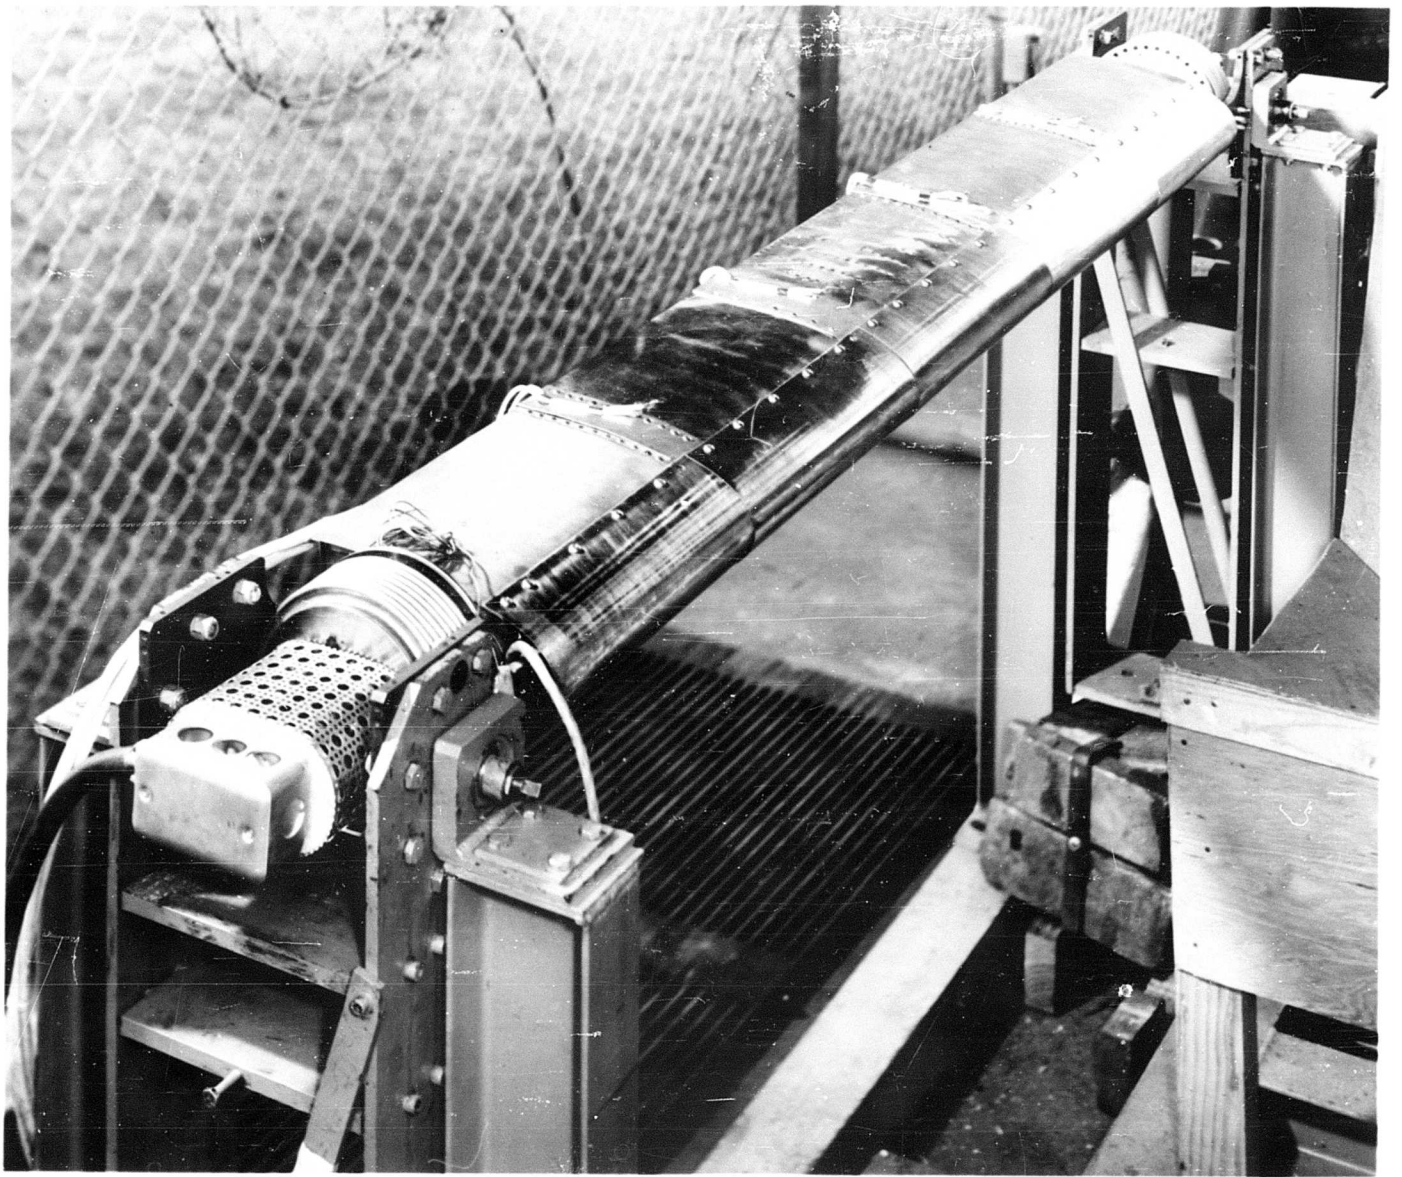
Screening Fatigue Test Specimen in Test Jig
